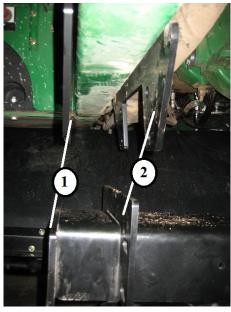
LH Side Support Alignments Key 1 – Outside Support Alignment Key 2 – Inside Support Alignment
